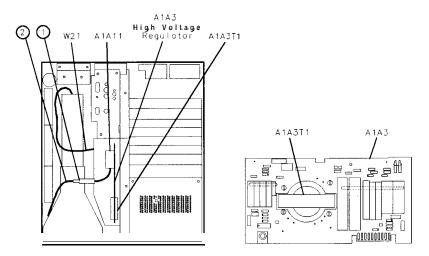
Discharging the CRT Post-Accelerator Cable
